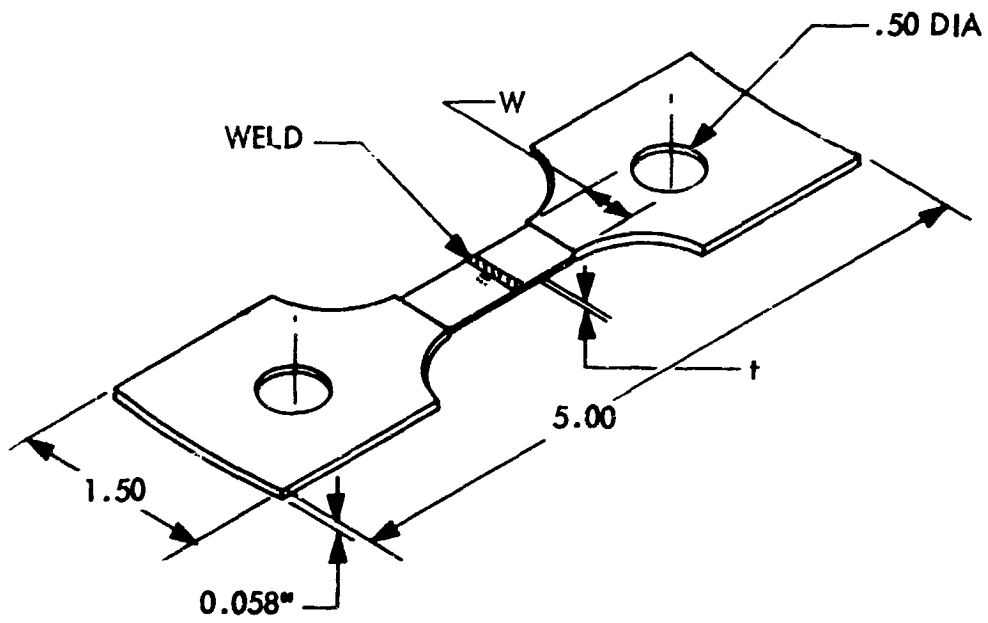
WELD SPECIMEN CONFIGURATION
